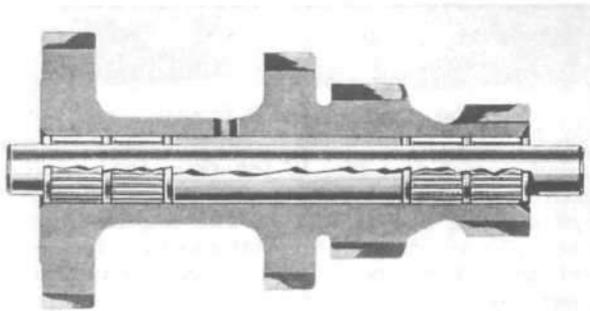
COUNTERSHAFT GEAR BEARINGS
